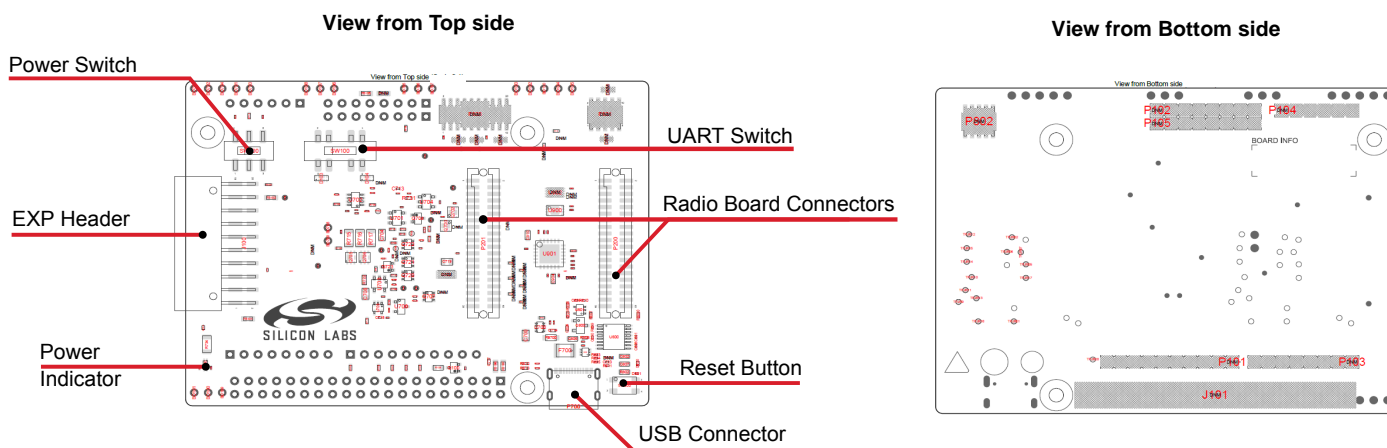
BRD8045A Adapter Board Hardware Layout
